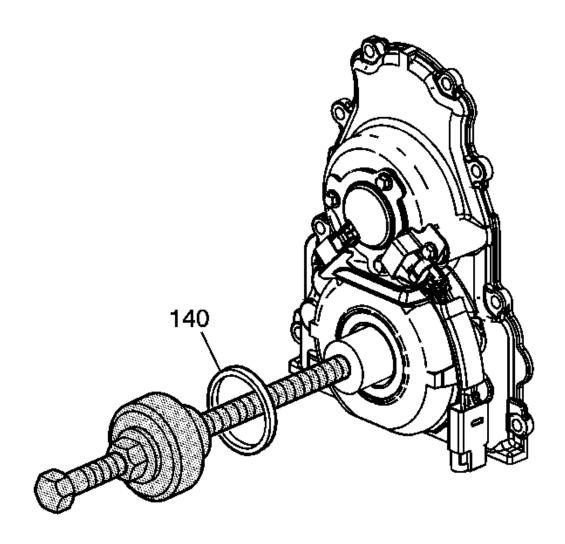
View Of Front Oil Seal & Special Tool Courtesy of GENERAL MOTORS CORP.
